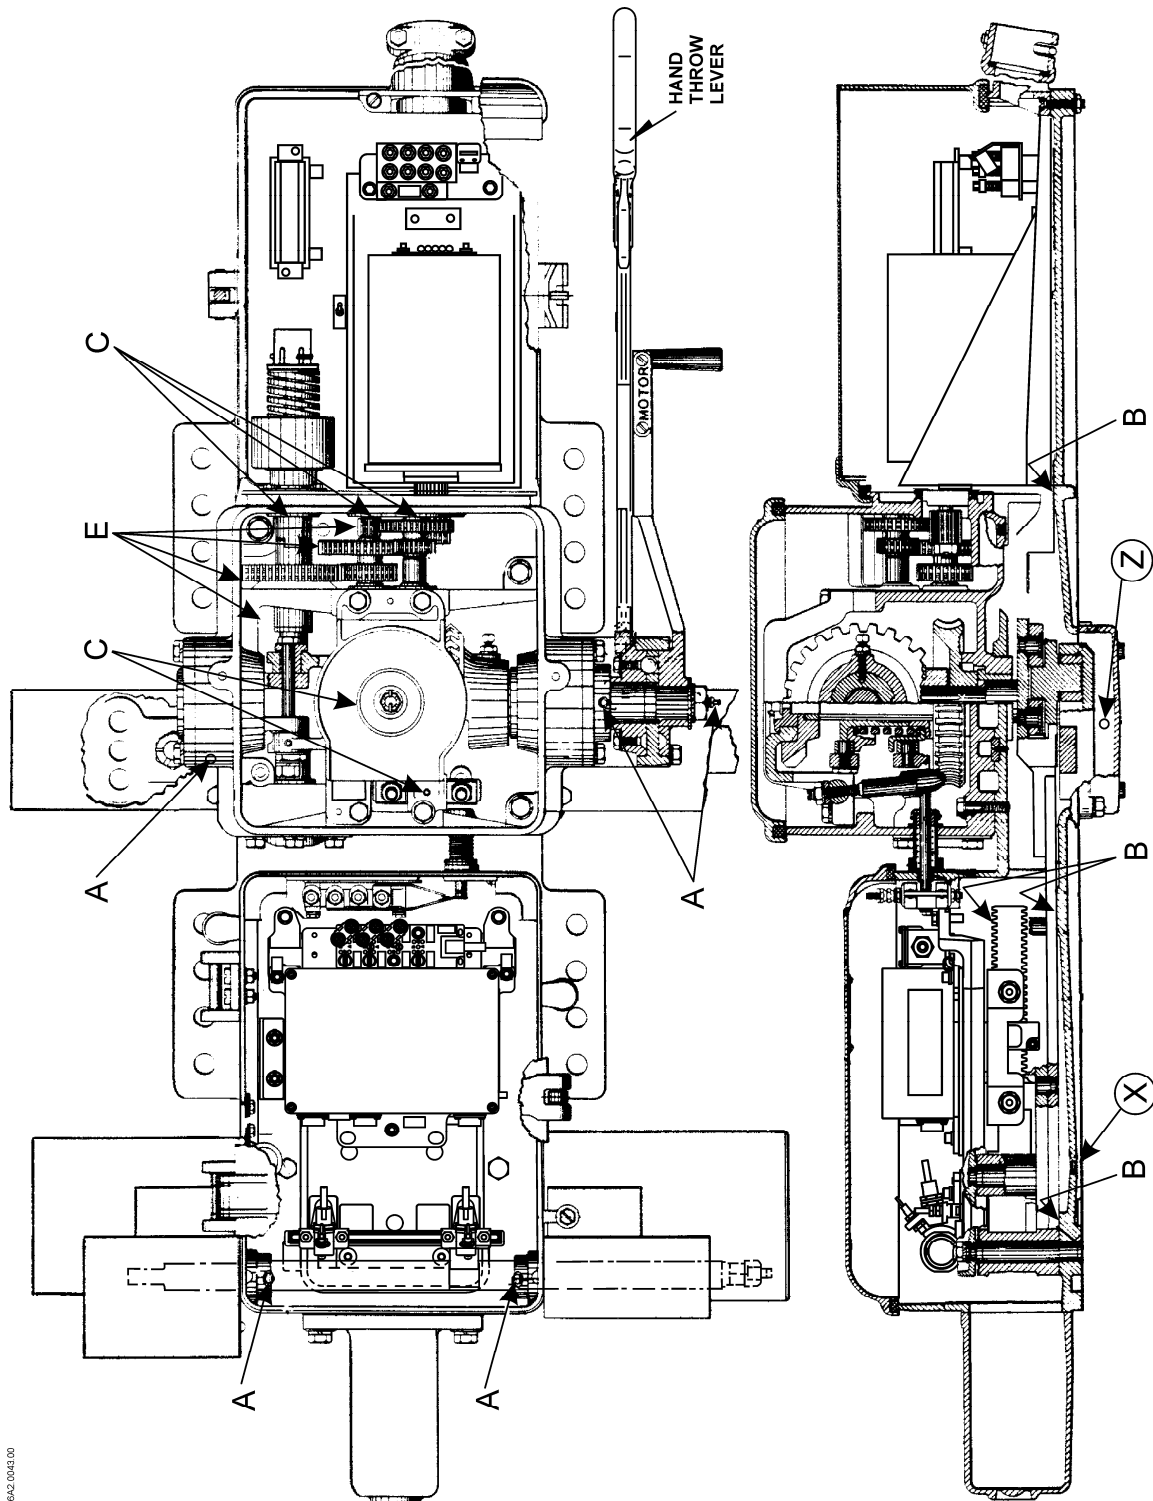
M-23 Switch Machine Lubrication Diagram
